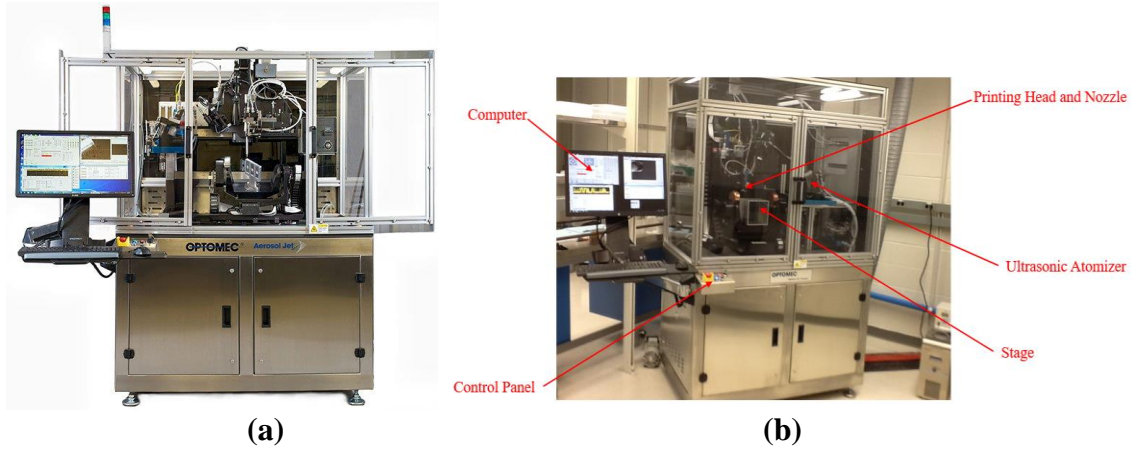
(a) Aerosol Jet 5X printer (b) Printer parts
